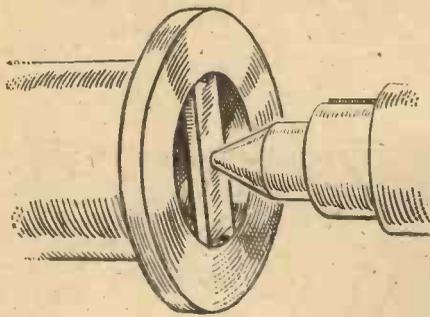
One method of turning a flanged cylinder between centres. This method is often adopted when carrying out turning operations on finished work so as to avoid chuck marks.
